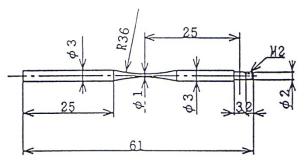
Shape and dimension of the specimen diameter of 1 mm
